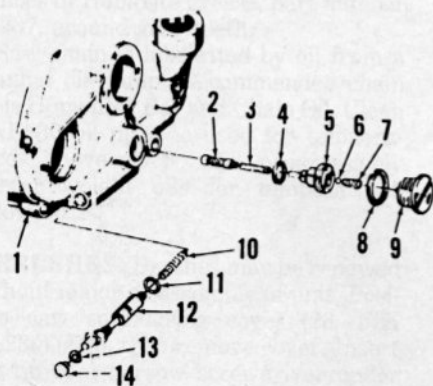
Exploded view of typical manual oil pump assembly.
